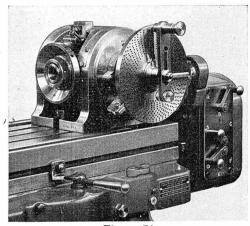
Long and Short Lead Attachment for Dial Type Milling Machines
